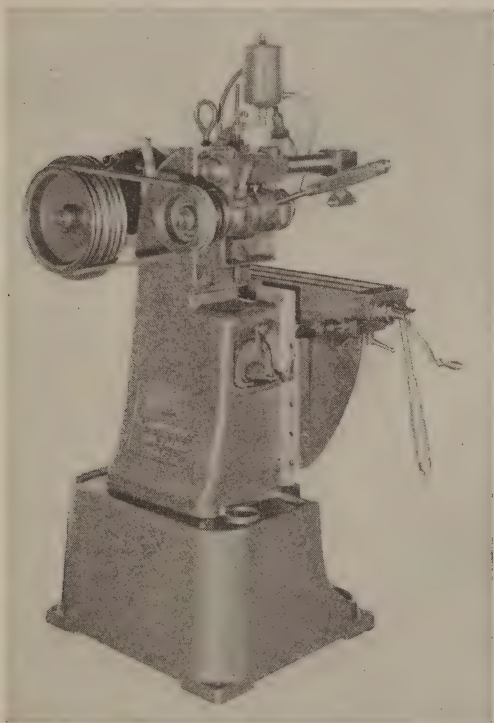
Hand milling machine ("Whitney"). (Courtesy of W. H. Nichols.)
